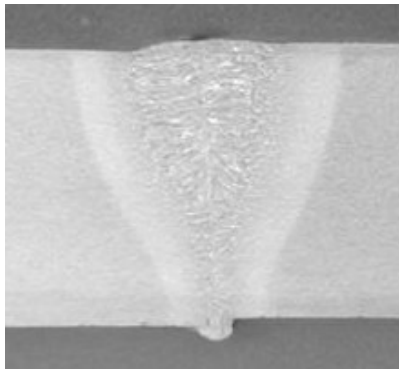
Macrosection of LB weld on S500MC steel 6.8 mm thick. Note the flat reinforcement cap low susceptible to be altered by the additional heating.
